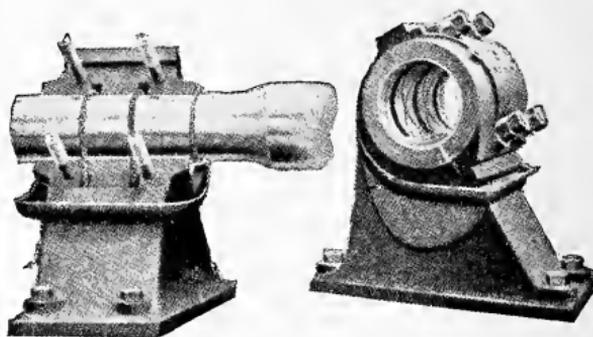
Out-Board Bearing of Simpler Construction than Main Bearing
